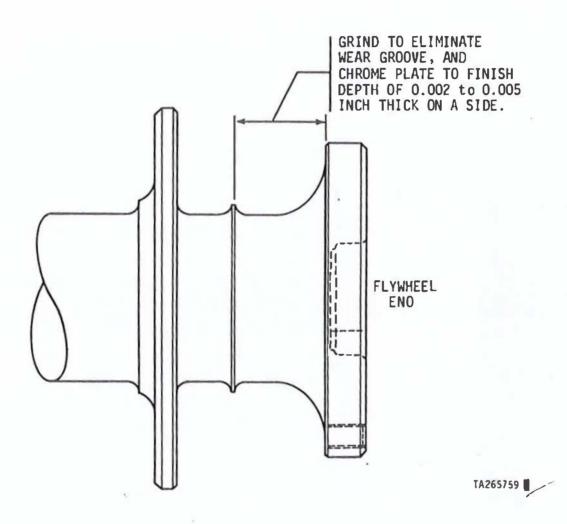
Crankshaft rear oil seal restoration area.
